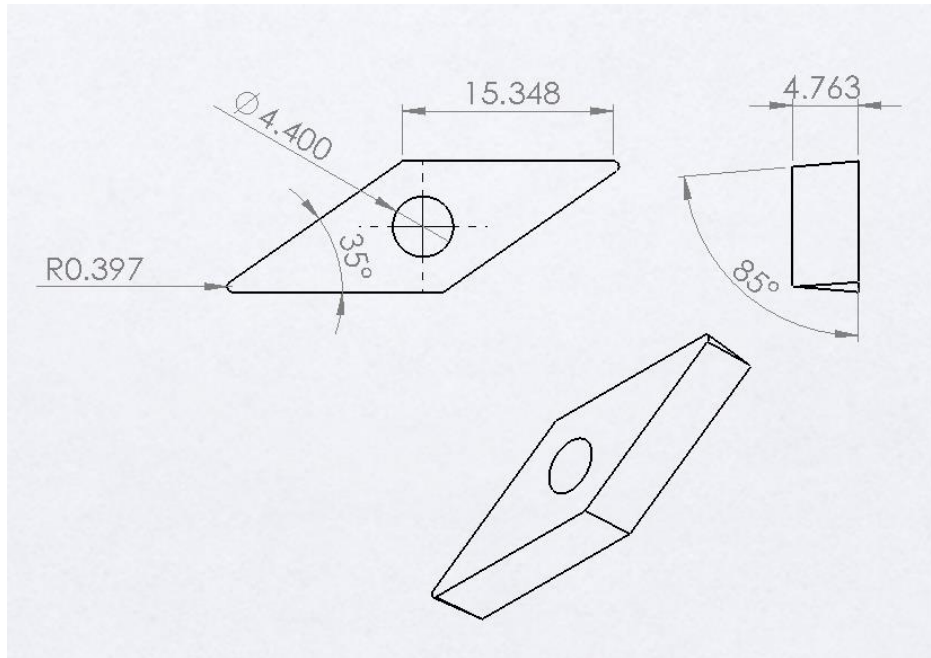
Multiview Drawing of a Kennametal V-Series Carbide Turning Insert, units are in mm, degrees. Drawing Courtesy of Kennametal Graphics Department
